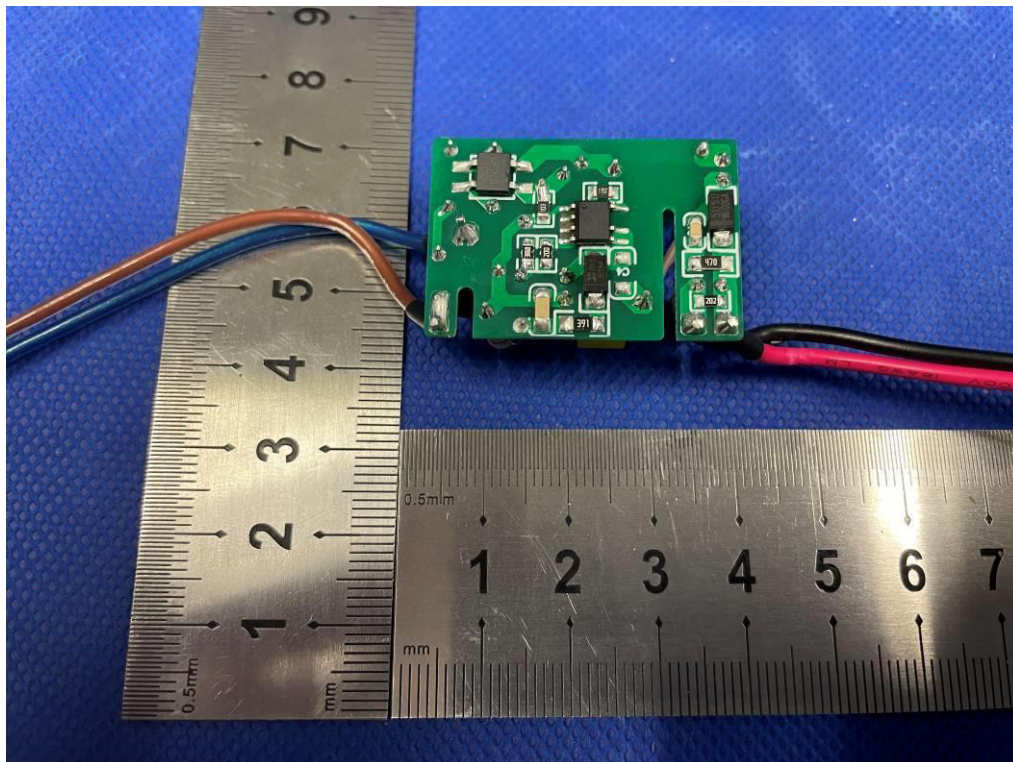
Bottom view of driver PCB for model MINI-4-xxx
